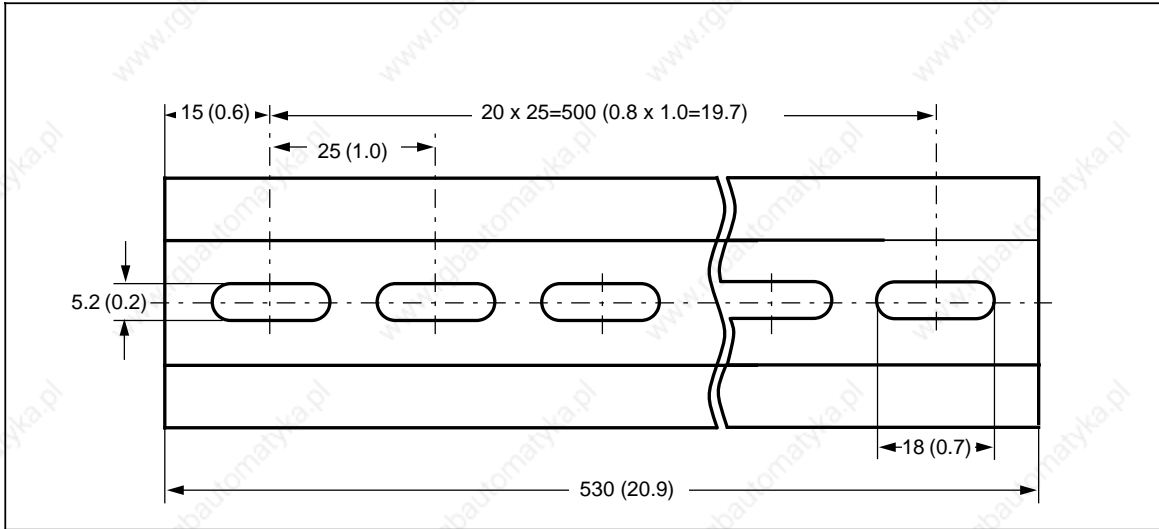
Dimension Drawing of the 530-mm (20.9-in.) Standard Mounting Rail
